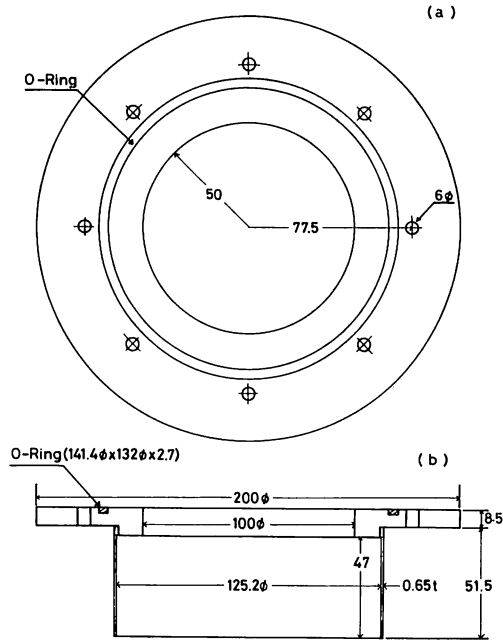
Dimension of the cryostat (IV): (a) Top view; (b) Cross-sectional side view.
